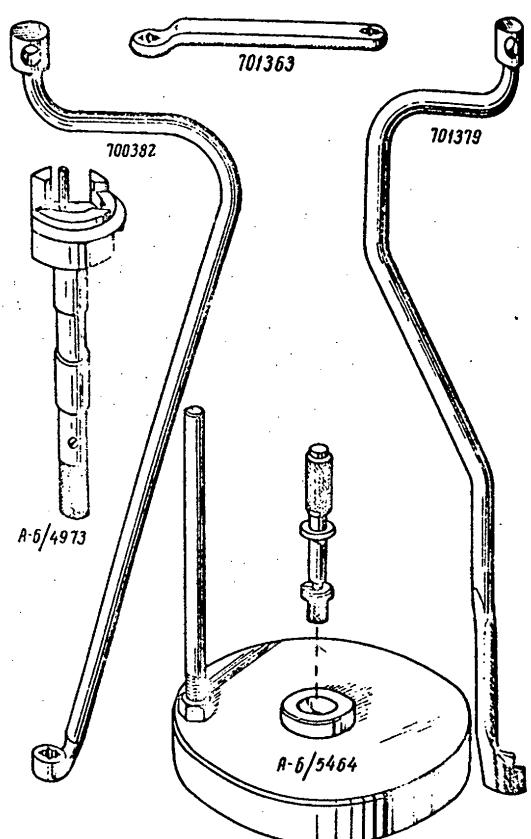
TOOLS AND FIXTURES FOR CYLINDER ASSEMBLY
